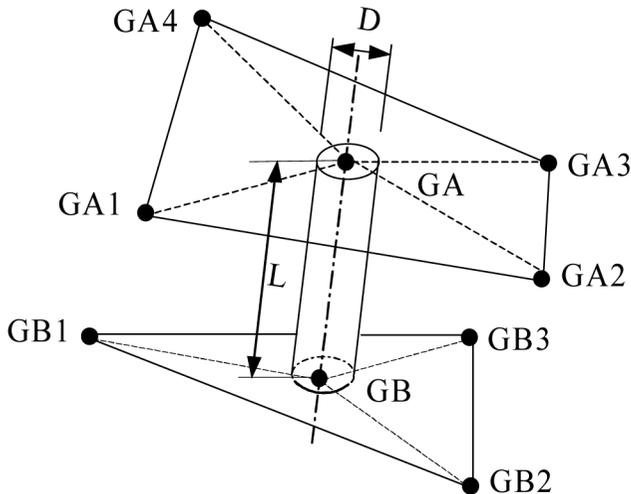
Length and Diameter of the Weld Connector
